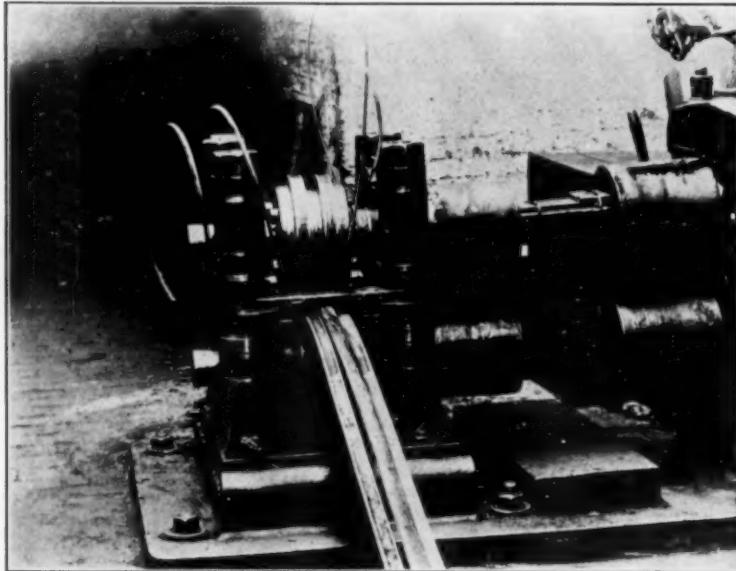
SLITTING THE STRIP FOR MAKING THE BLADES OF A PARSONS TURBINE.
